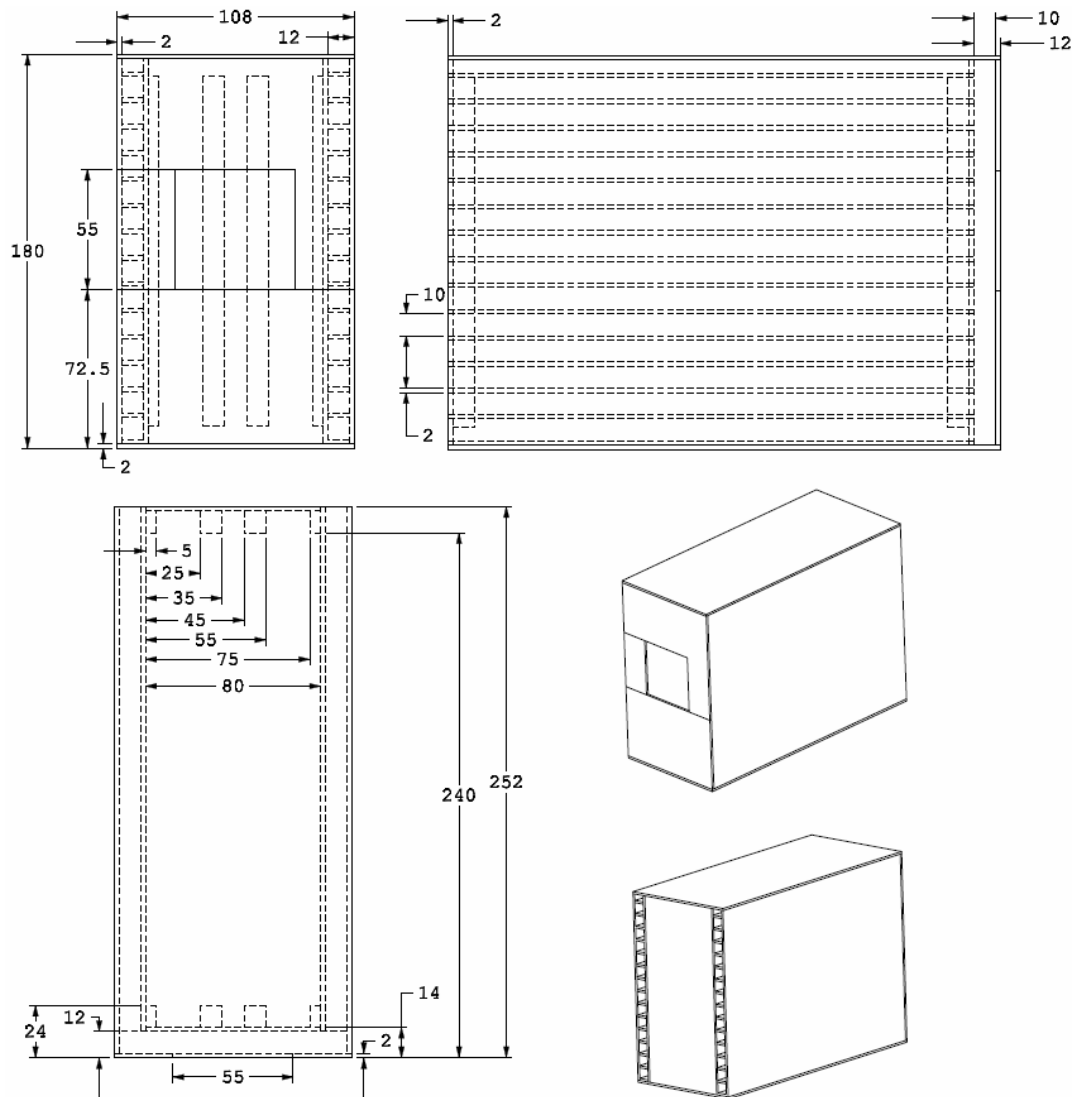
External dimensions of 1/2 ATR Chassis of the third case
